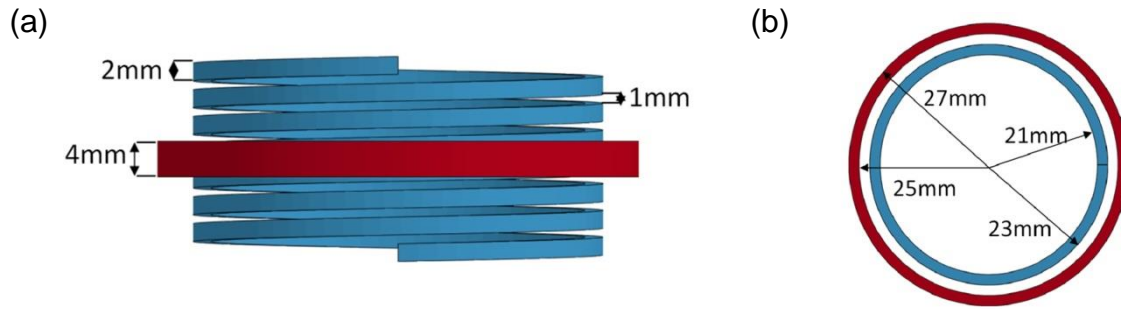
Illustration showing the geometry of the ideal model (a) side view (b) top view.
